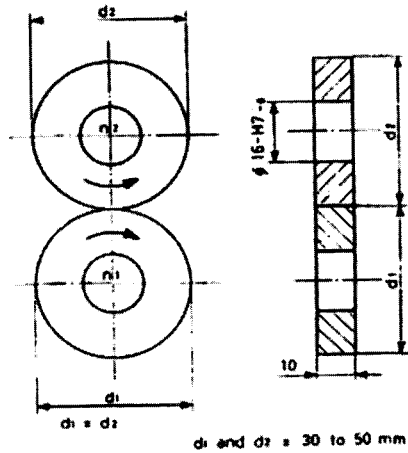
Rolling and sliding wear test specimen's shape and dimensions
